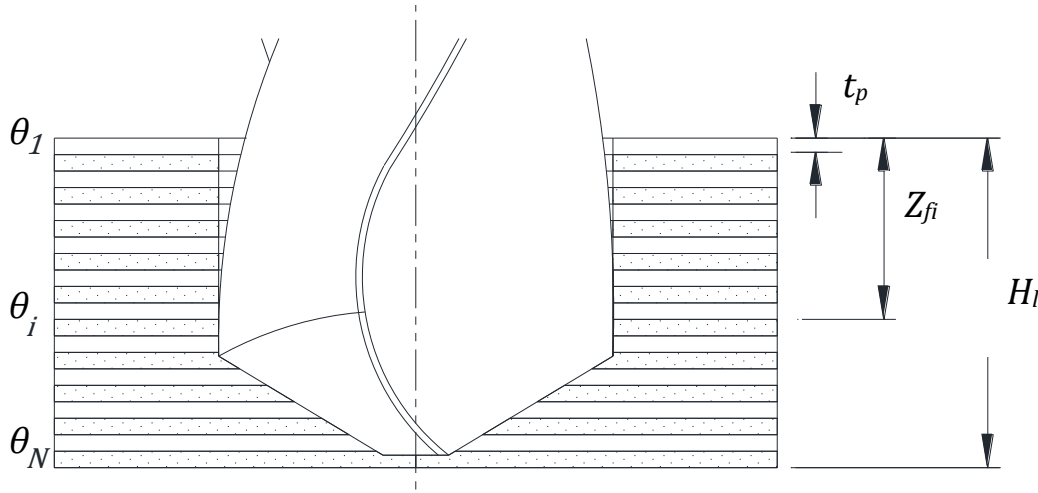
Main dimensions and angles used to define the tool geometry of a 2-flute drill bit
